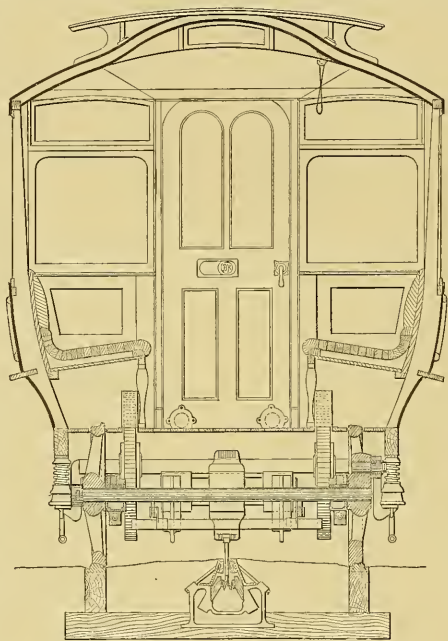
END VIEW OF CAR, SHOWING MOTOR, GEARING, CONNECTIONS, CONDUIT, CONDUCTORS, AND TRACK CONSTRUCTION.
